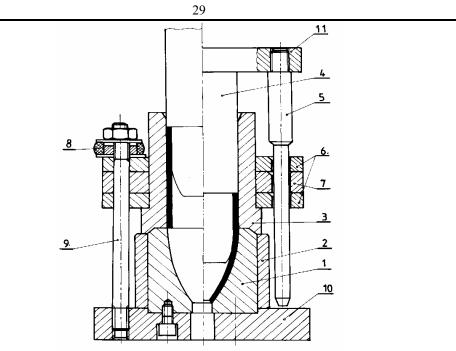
View of the tool for necking-in process of an axial-simetrical work-piece
